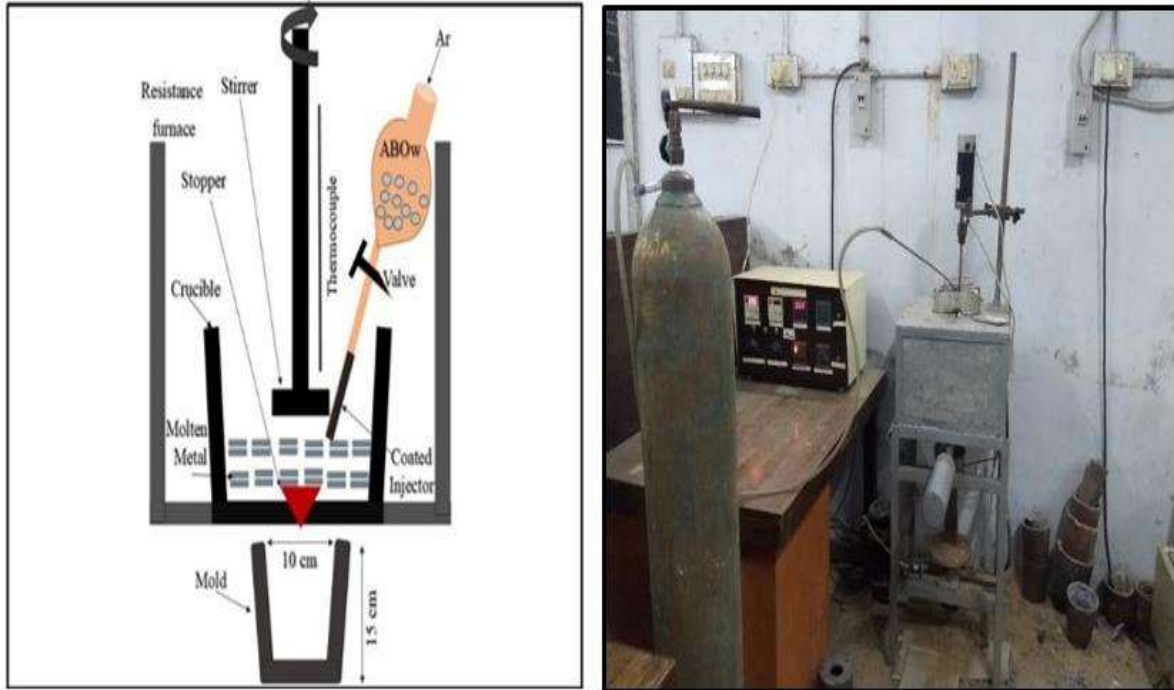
(a) Schematic of the experimental set-up used (b) pictorial view of compo-casting techniques
